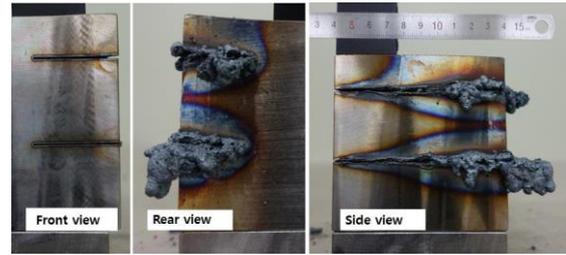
Stainless steel after cutting (thickness: 100 mm, nozzle throat: 4mm, cutting speed: 45 mm/min and 50 mm/min)
